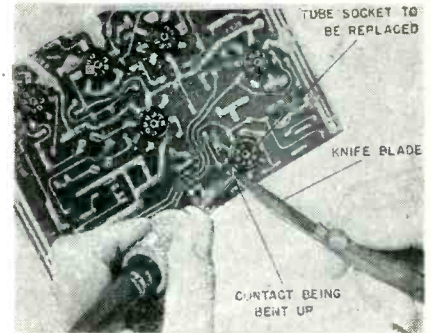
Removal of tube sockets mounted to wiring side of board by bending up the socket contacts.
